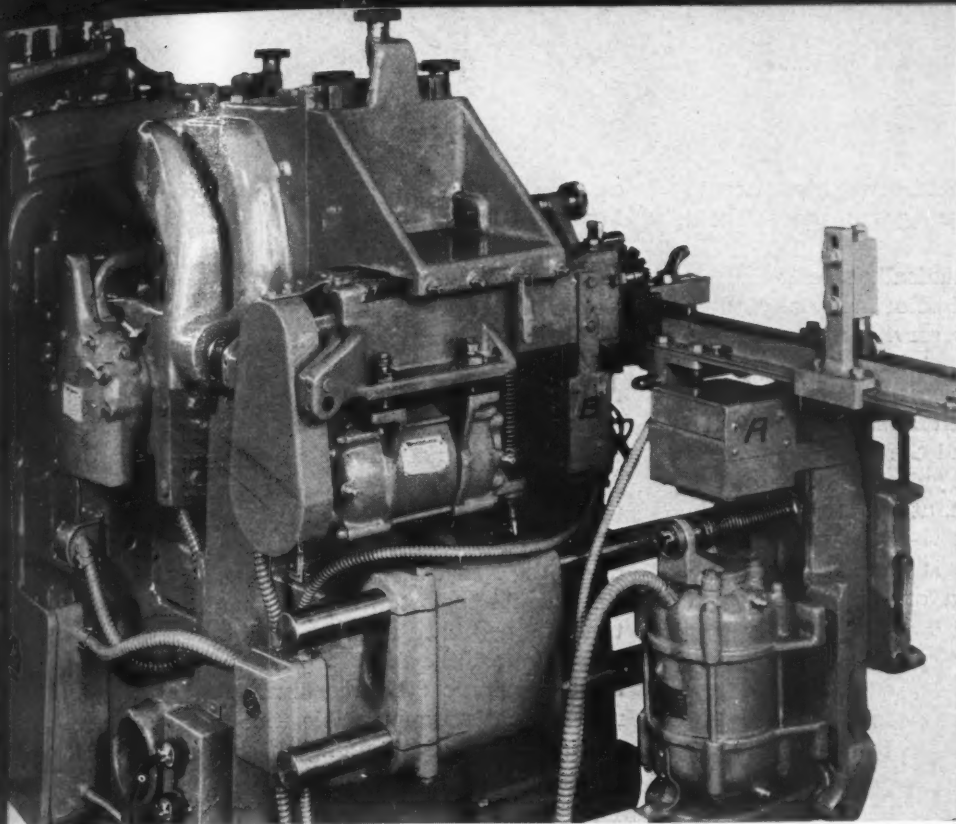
Solenoids accurately control cutters on woodworking machine operating at 120 feet per minute with 40 cutting operations
